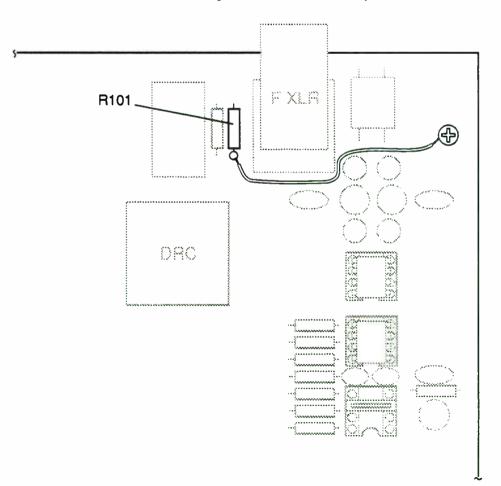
Partial simplified view of Audio Board (component side). Solder one end of an insulated buss wire to R101 pad and connect other end to the nearest Phillips screw (that holds board to chassis).
